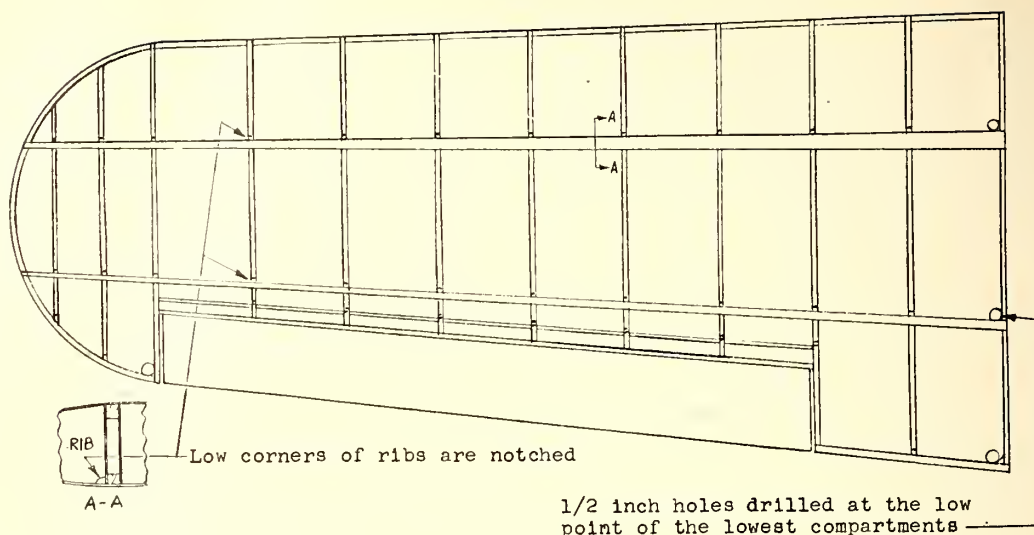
Drainage Diagram of Wing, Internal Method.
